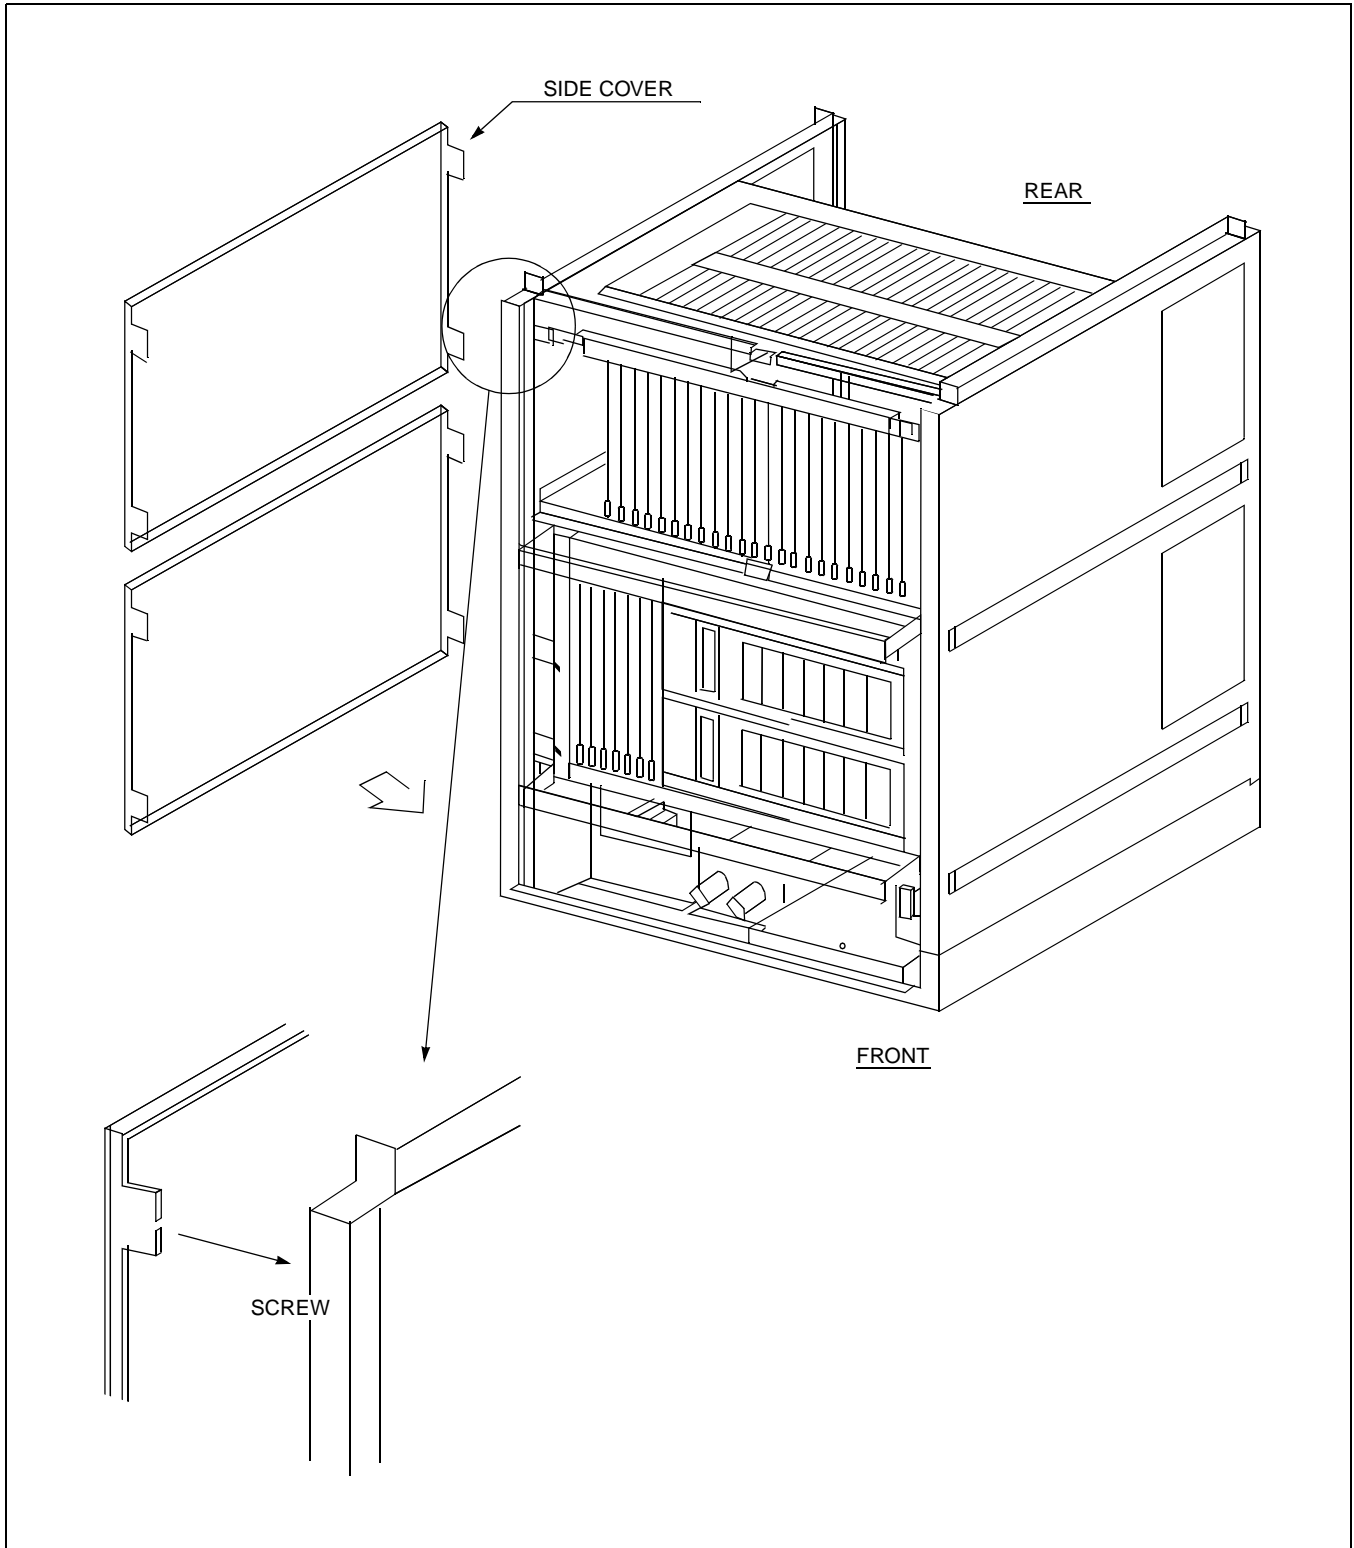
Side Cover Mounting Method (BASEU+LPR+PIM0)
